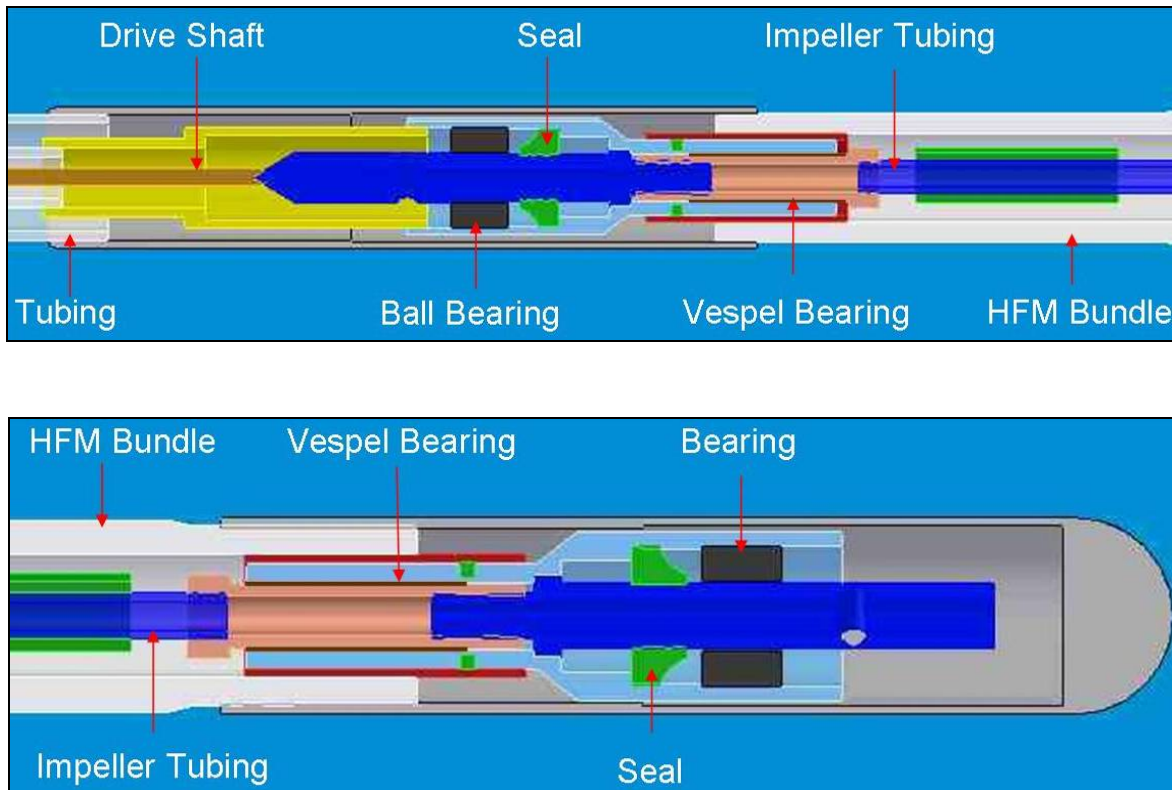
Impeller catheter medial manifold (top) and distal manifold (bottom).
